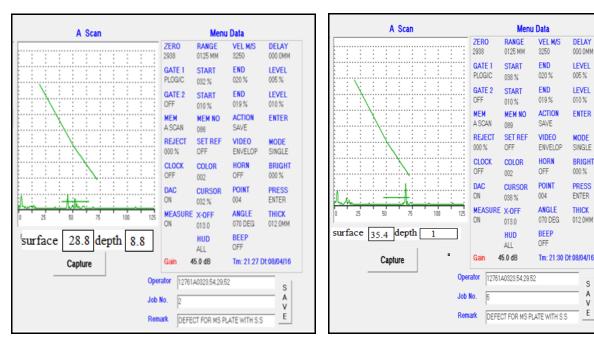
Mild steel plate clad with stainless steel electrode defects
